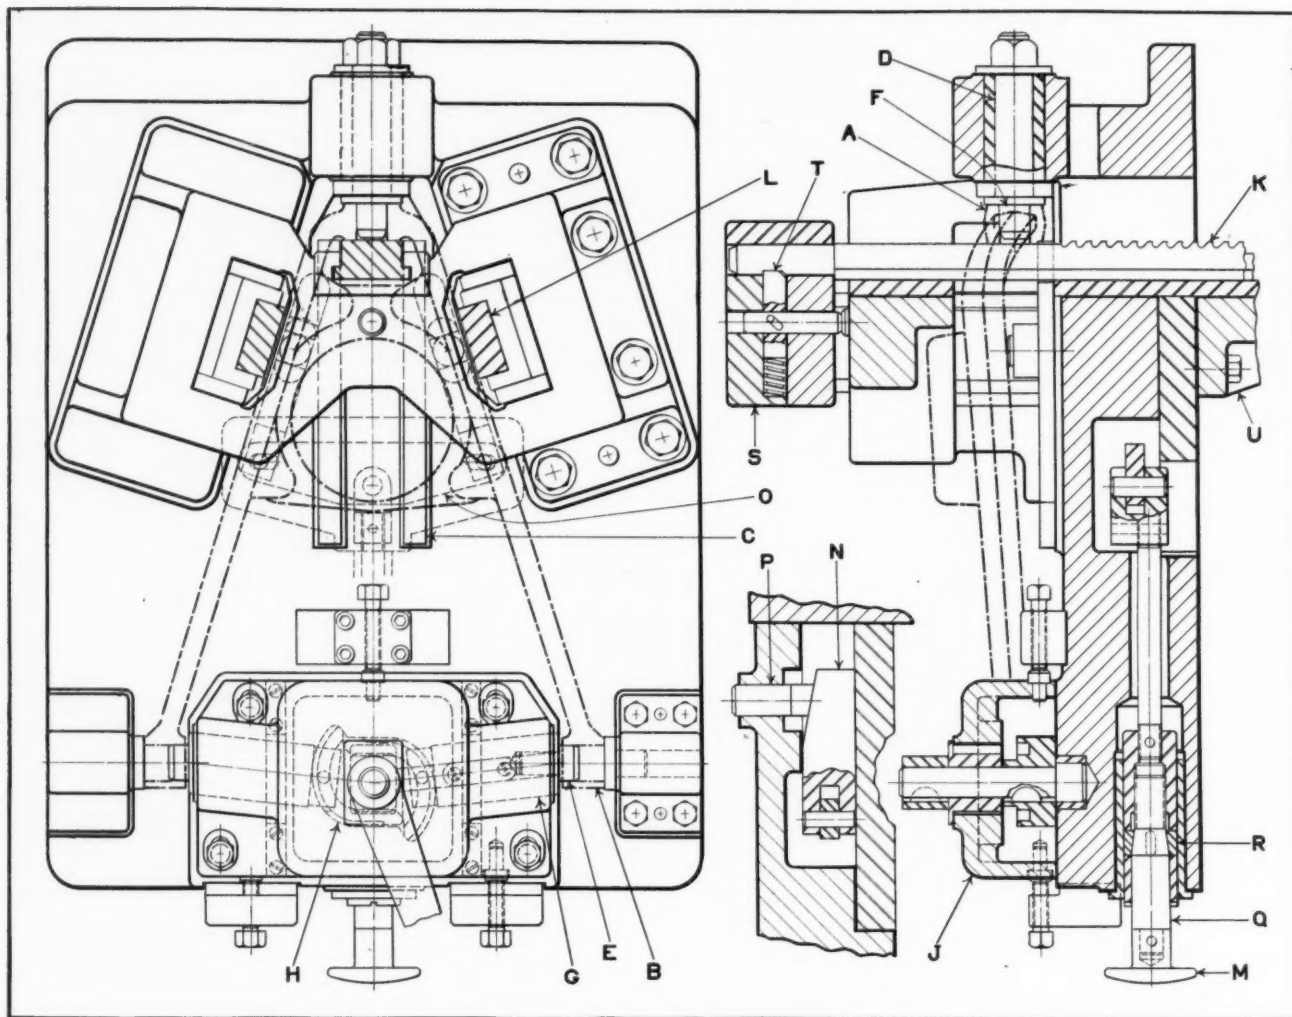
Details of Construction of the Broaching Fixture Illustrated in Fig. 3
